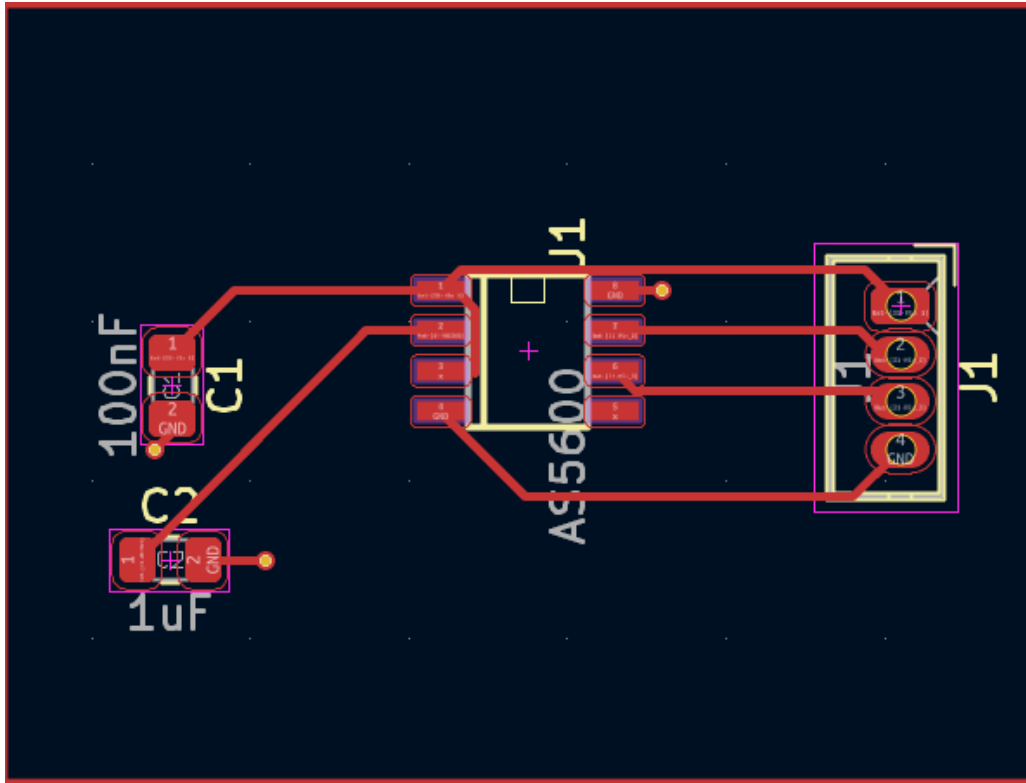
AS5600 Encoder Breakout PCB Layout
